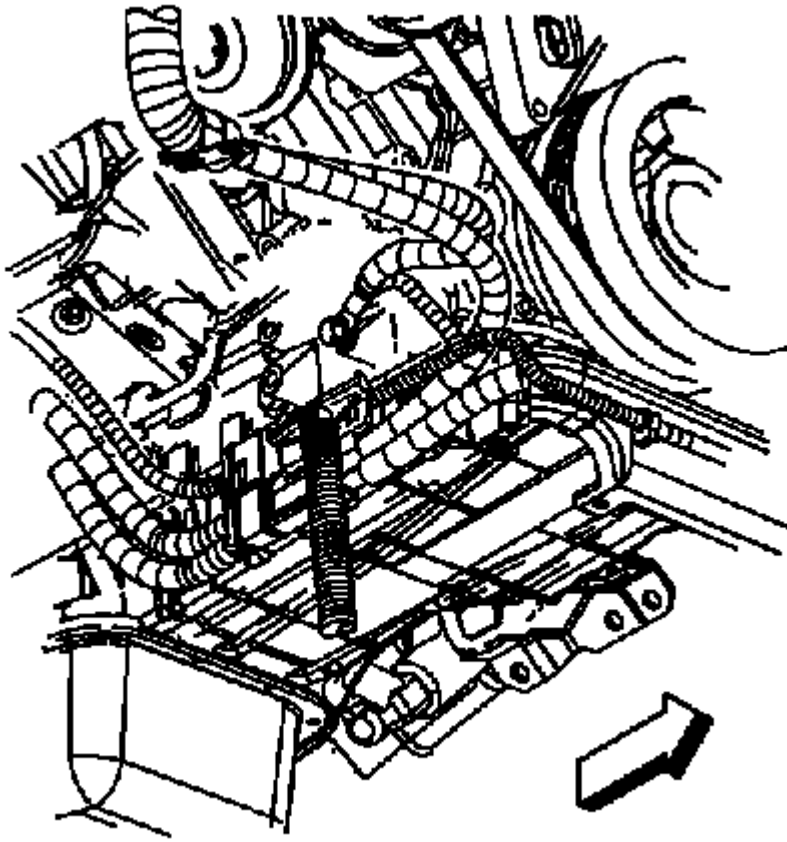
View Of Ground Wire Bolt Bosses (Right Side)
